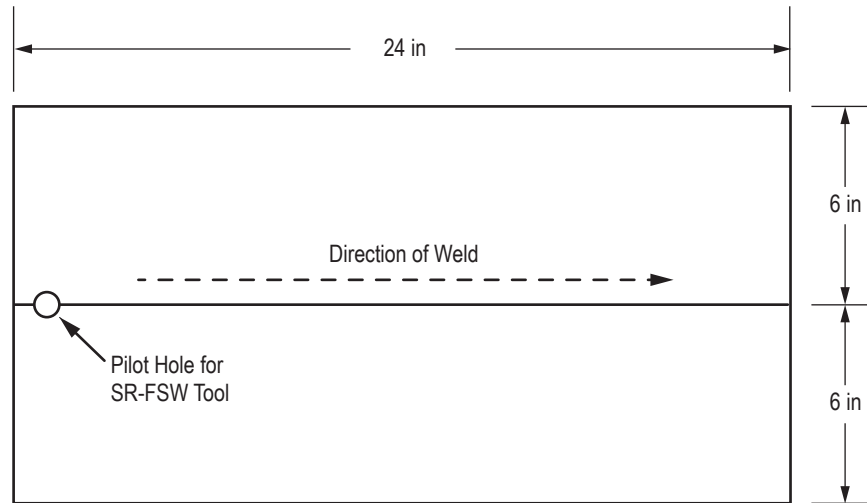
Self-reacting friction stir weld test panel configuration.
